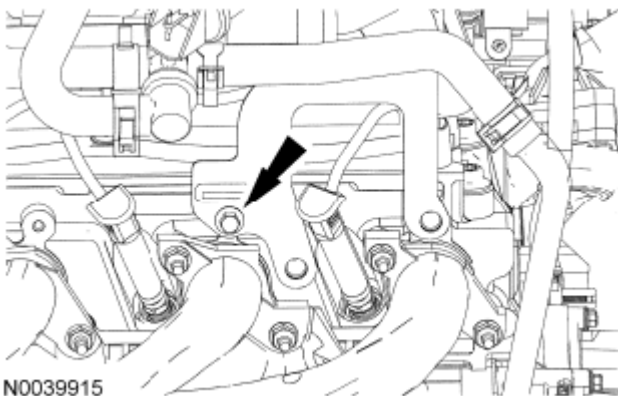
Locating Heater Hose Tube Bracket And Hoses Assembly With Bolt
